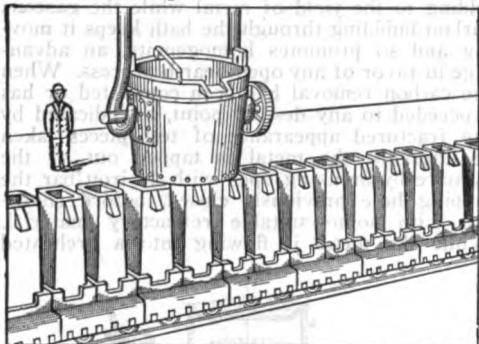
GENERAL ARRANGEMENT OF MOLDS WHEN CASTING INGOTS WITH BOTTOM POURING LADLE.
